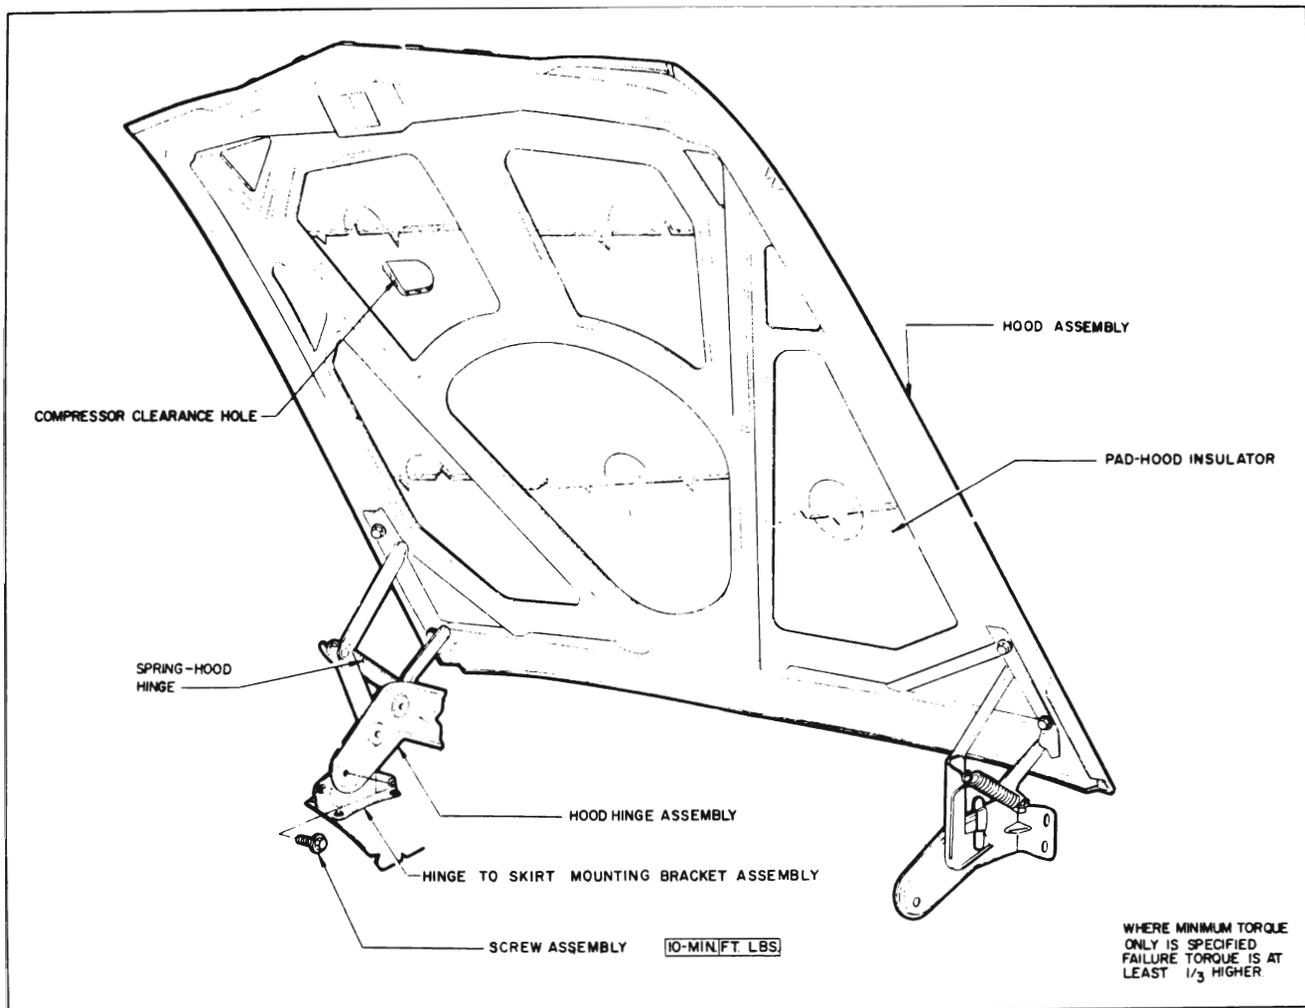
Hood &amp; Hood Hinge Assembly—4400-4600-4800 Series
